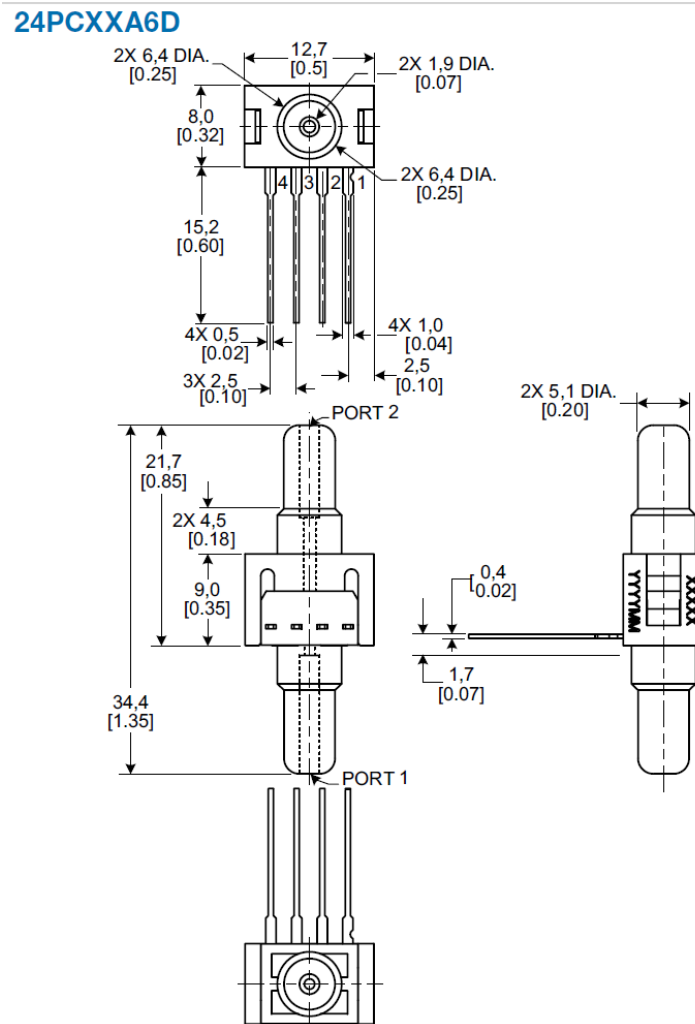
Technical drawing of the Honeywell 24PCXXA6D pressure sensor (Honeywell International Inc., 2015).
